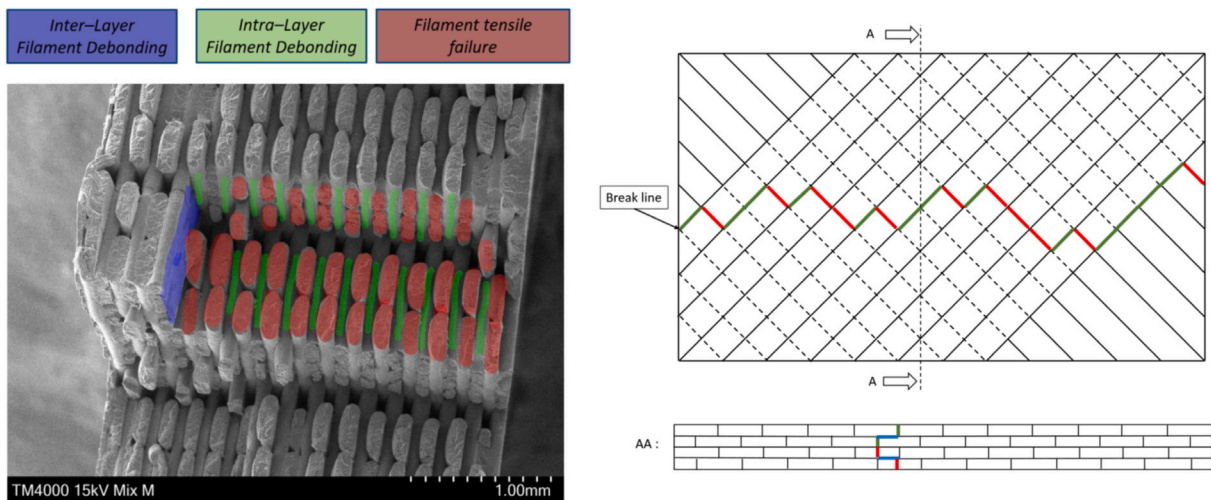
Failure analysis of the specimens printed at 45° with the 0.4 mm nozzle diameter & 0.1 mm layer height. (a) SEM fractography. (b) Frontal and (c) side schematics views of the crack path.
